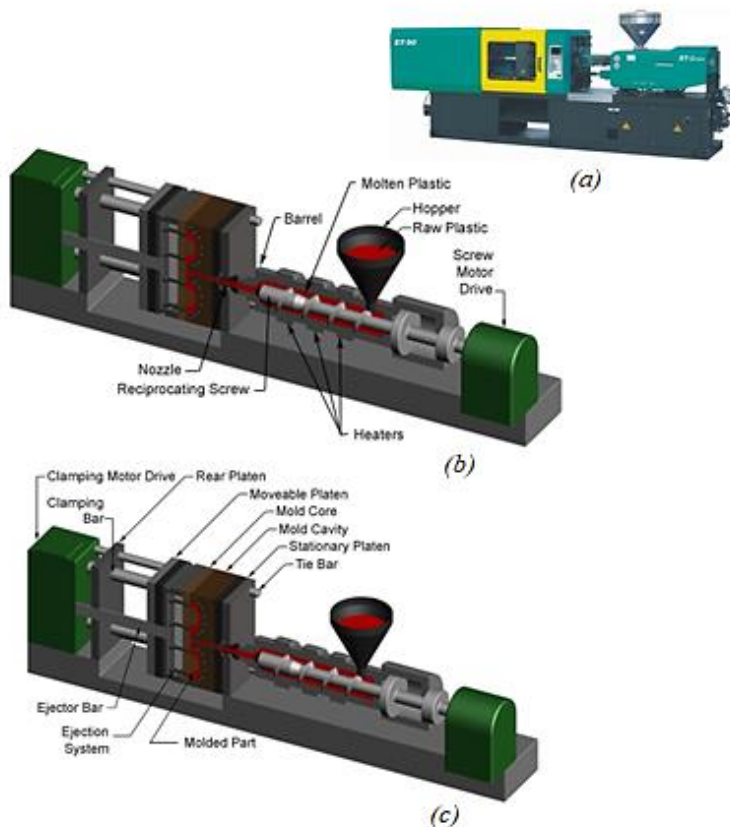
An example of an injection moulding machine (a), and its main components (b), (c).
